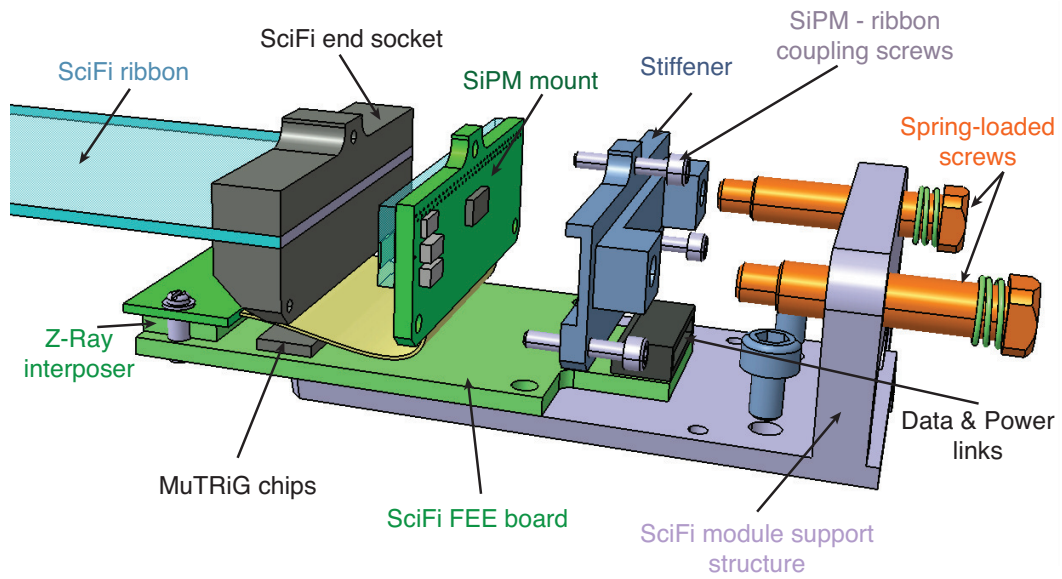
An exploded view showing the end piece assembly of one ribbon in a fiber module. The coupling between the SiPM and the polished ribbon surface is static, while the large spring loaded screws prevent sagging of the fiber mat under thermal expansion. The SciFi ribbon is installed on one side of the L-shape module support.
